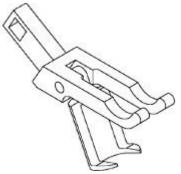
Rocker Arm Remover 8516A Courtesy of CHRYSLER LLC
